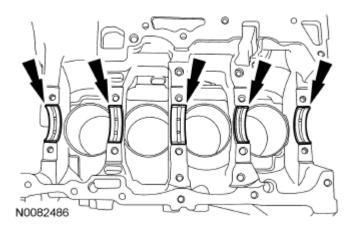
Locating Main Bearings Courtesy of FORD MOTOR CO.
